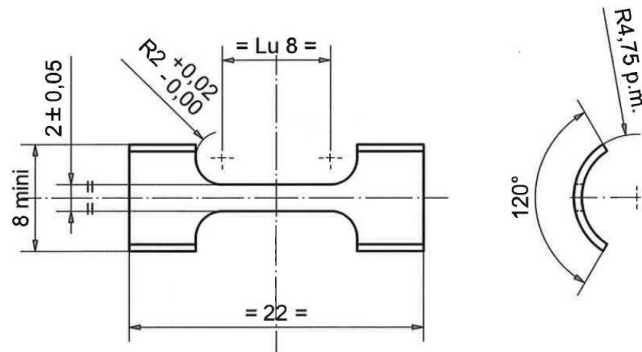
Specimen used for axial tensile tests on (prior-) β_{Zr} materials (dimensions in mm).
